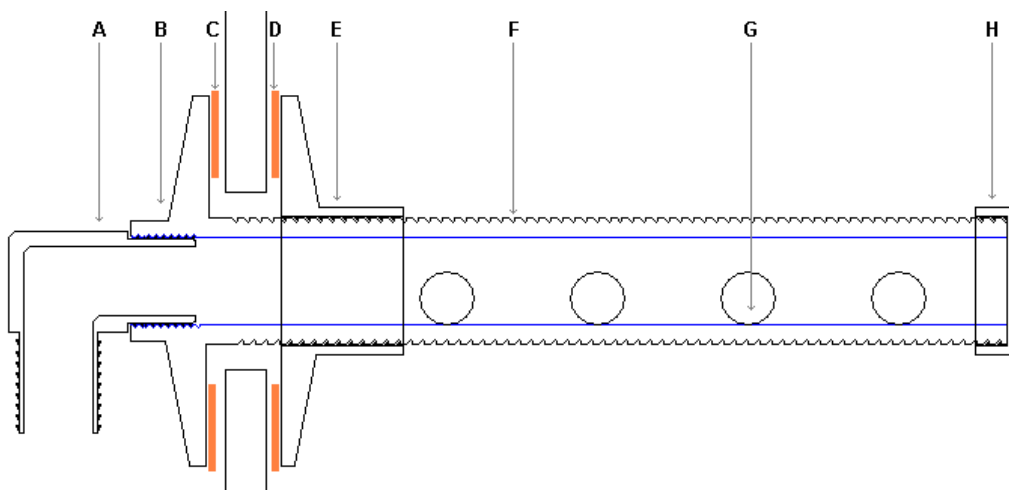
Diagram of the solvent injection port. (A – barbed fitting, B – flanged nut moulded to main shaft, C – gasket, D – gasket, E – outer fitting nut, F – main shaft, G – discharge holes, H – end cap)
